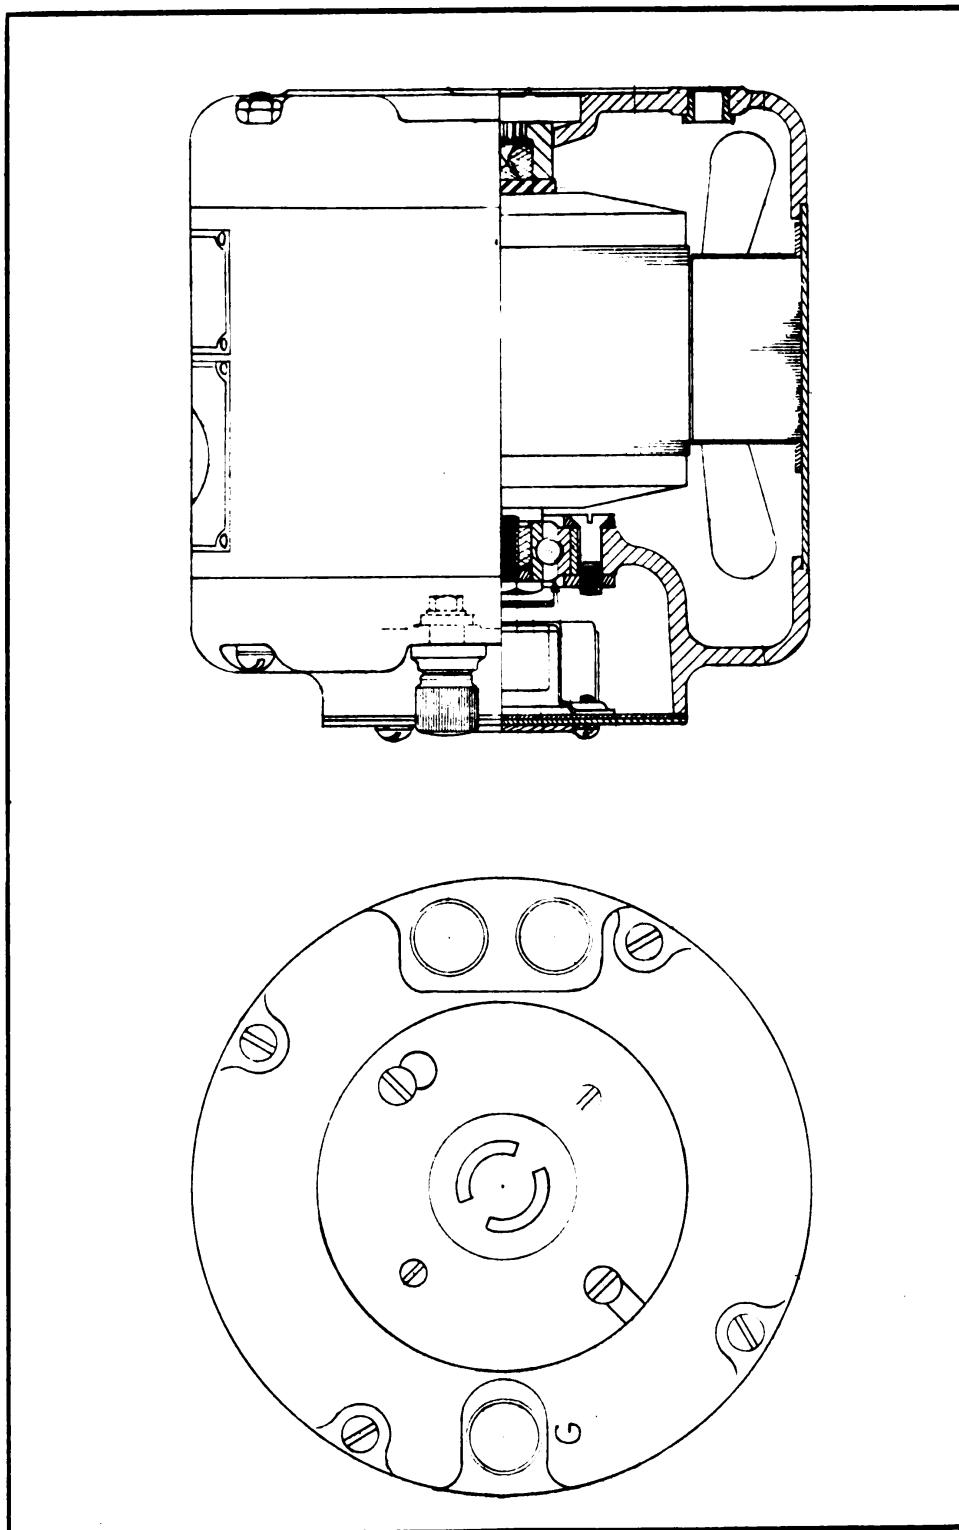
POWER UNIT PE-214-A—CROSS SECTION DRAWING
